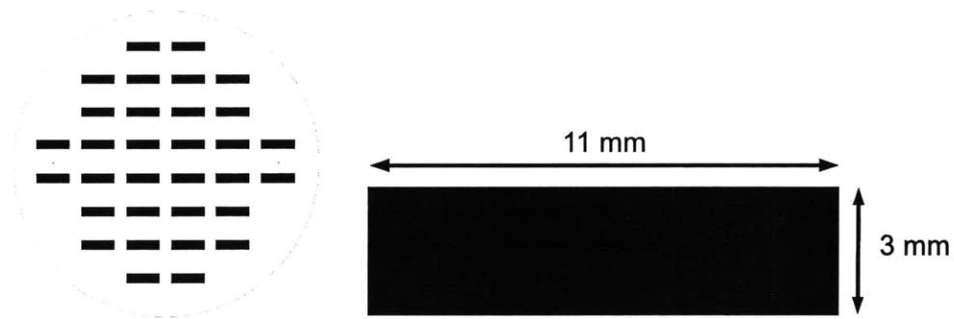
Back-side etch mask; whole wafer (left) and device dimensions (right). The mask is printed with a laser printer and subsequently transferred to a chrome blank. The actual mask is the negative image of this Figure.
